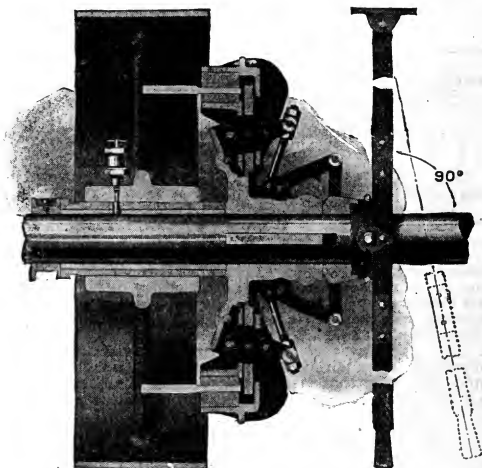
,251.—The Hill friction clutch pulley for power control. The clutch mechanism will start a load equivalent to the double belt capacity of the pulley to which the clutch is attached.
